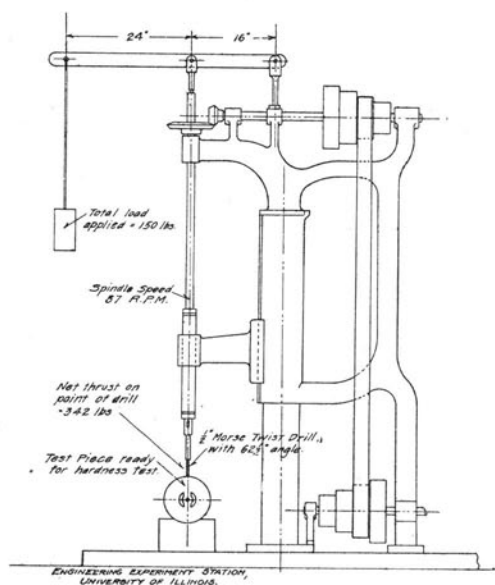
DRILL PRESS, SHOWING METHOD OF MAKING
